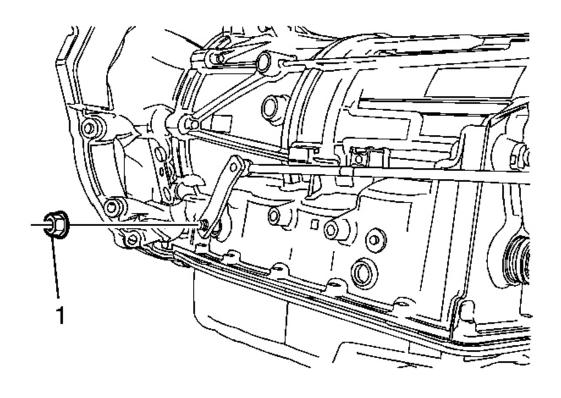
View Of Vent Hose Assembly Courtesy of GENERAL MOTORS CORP.
